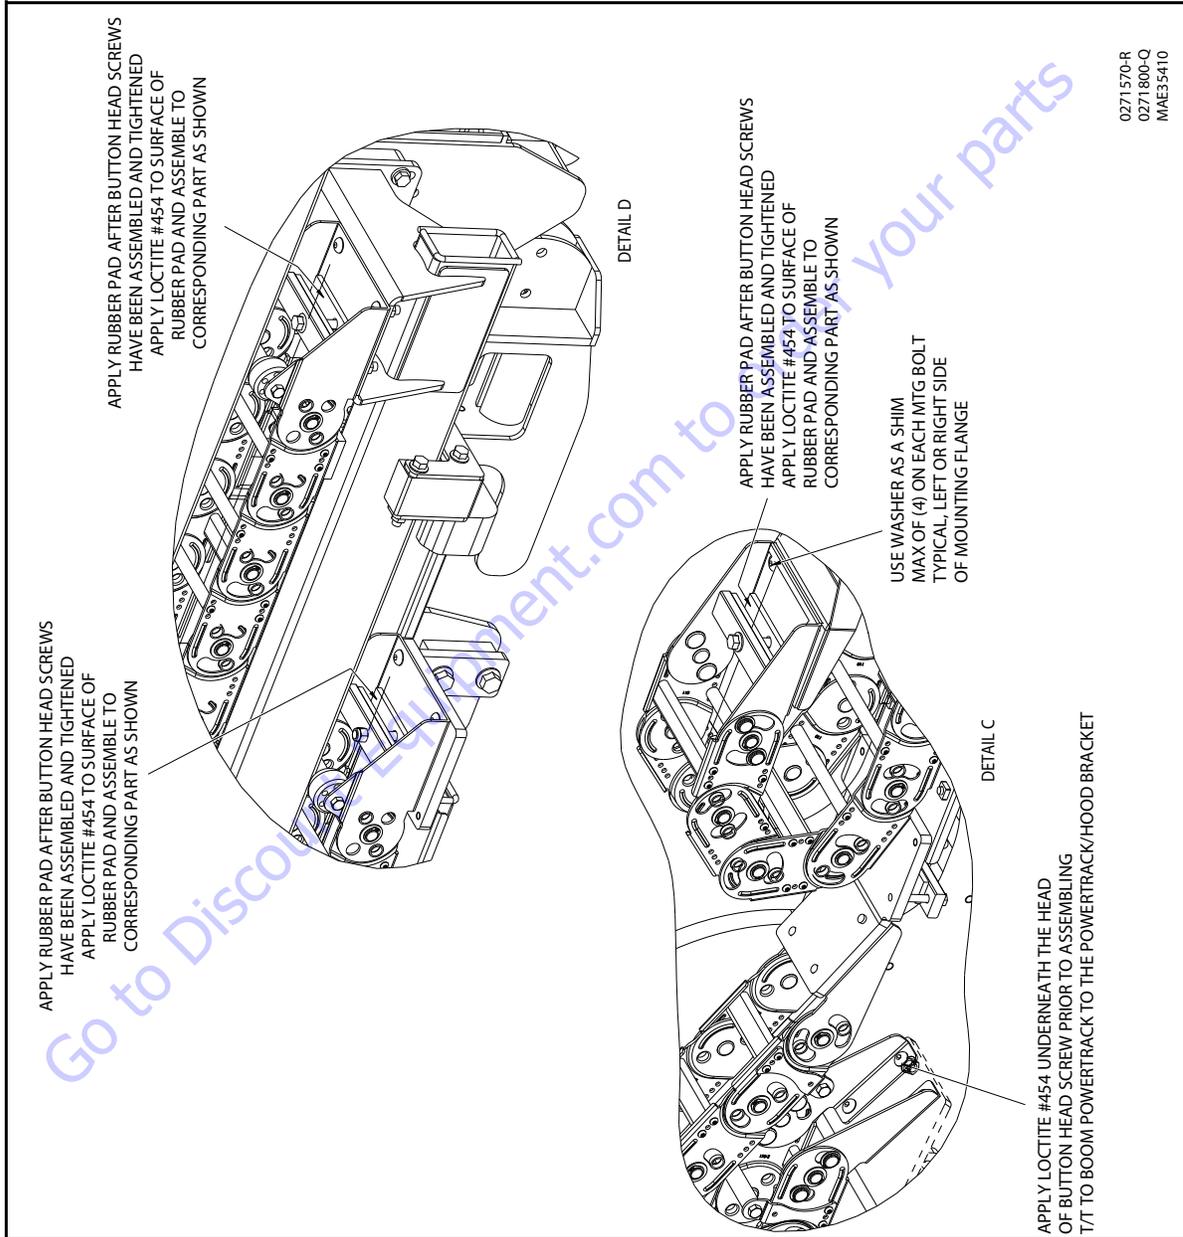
Powertrack Installation - Sheet 2 of 6
